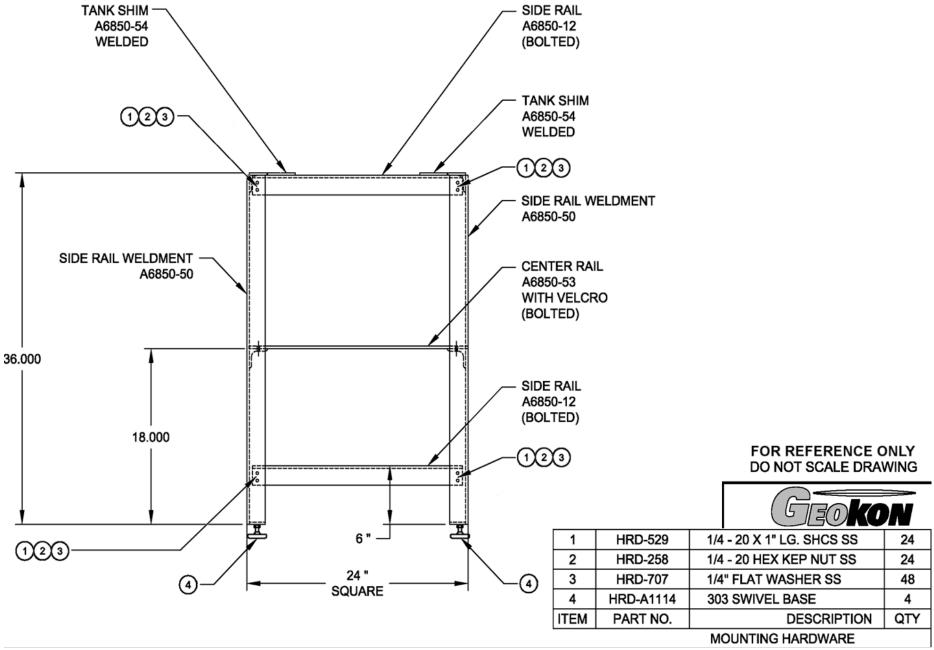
Inverted Pendulum Measurement Table Assembly Print
